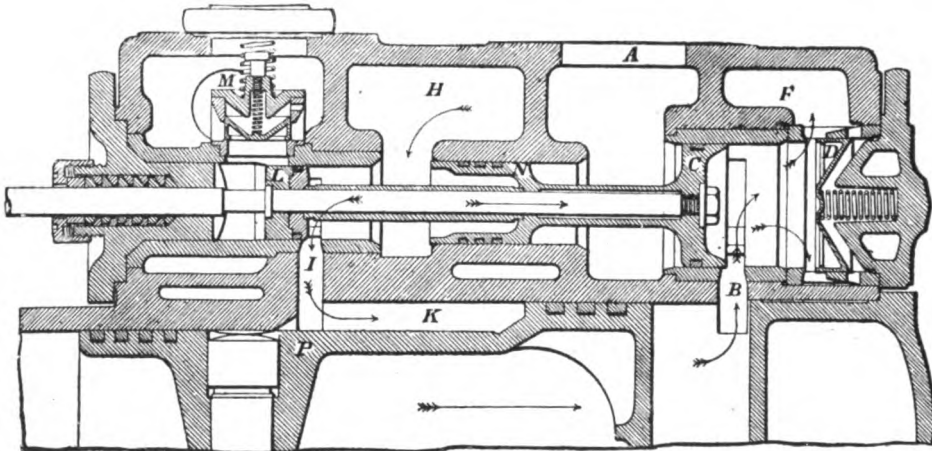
"KOSTER" AIR COMPRESSOR CYLINDER VALVE.
